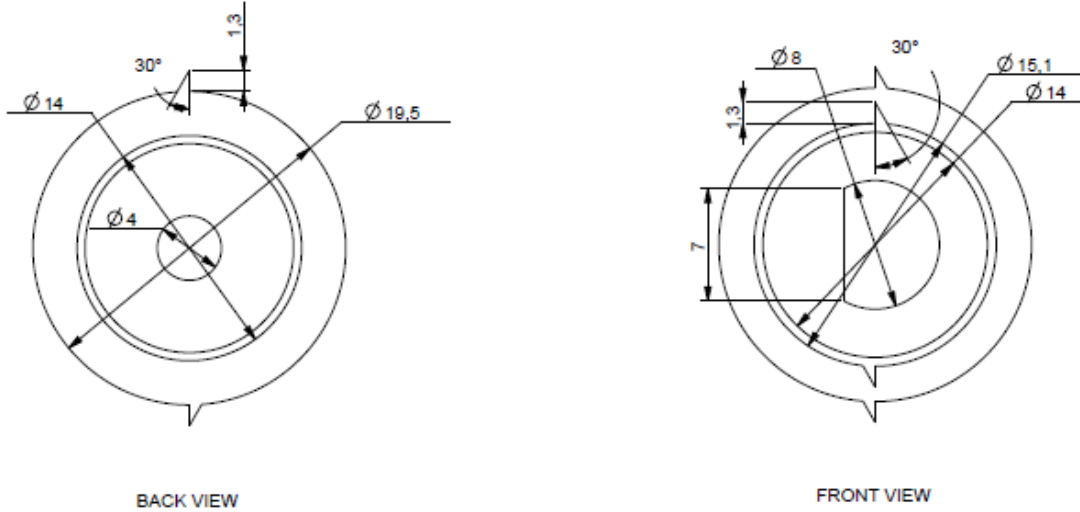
Back and front view of the 30mm chinchin cutting shaft
